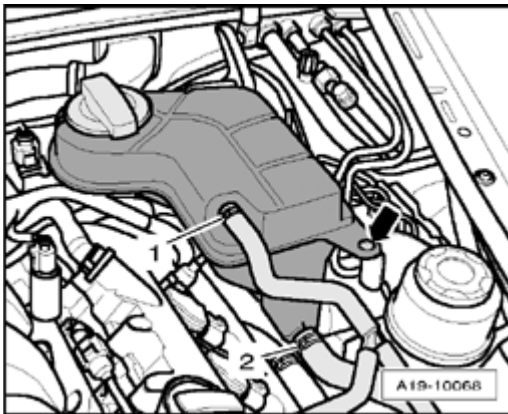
Removing Coolant Hoses At Coolant Expansion Tank
